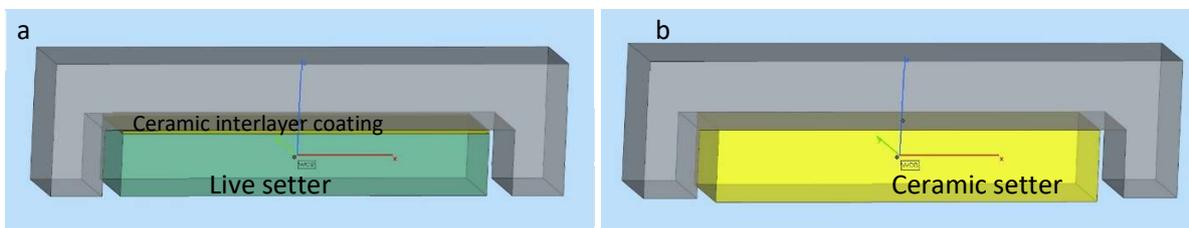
(a) CAD design of a simple supported part with a live-setter with ceramic interlayer coating (b) CAD design of a simple supported part with ceramic setter.
